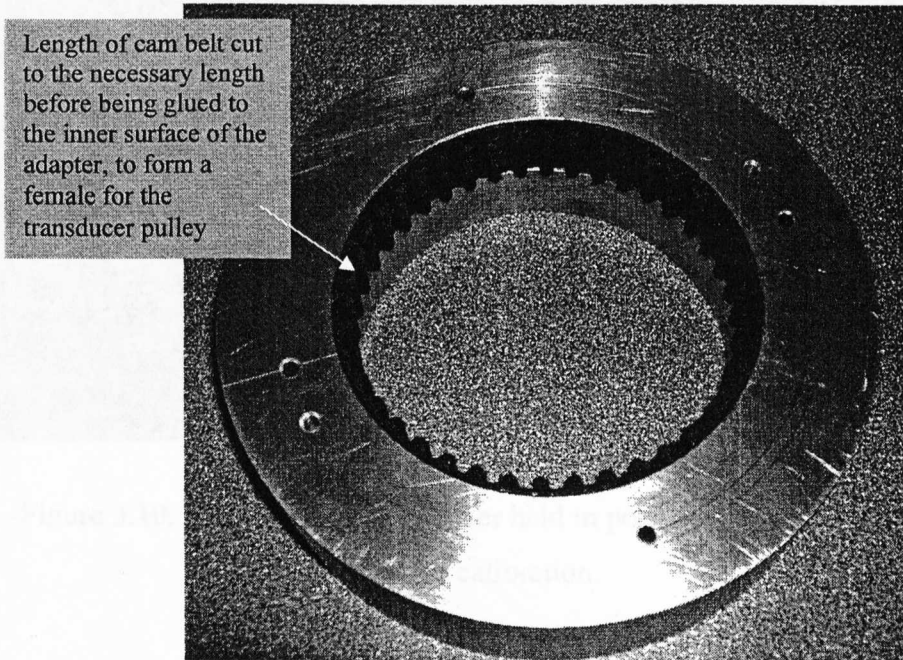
Female adapter designed to hold the pulley torque transducer to ensure pure torque during calibration.
